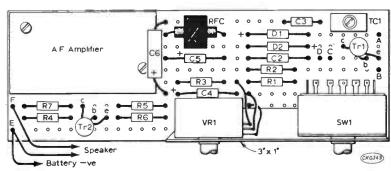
The component layout on the circuit board; the top section shows the underside wiring.
